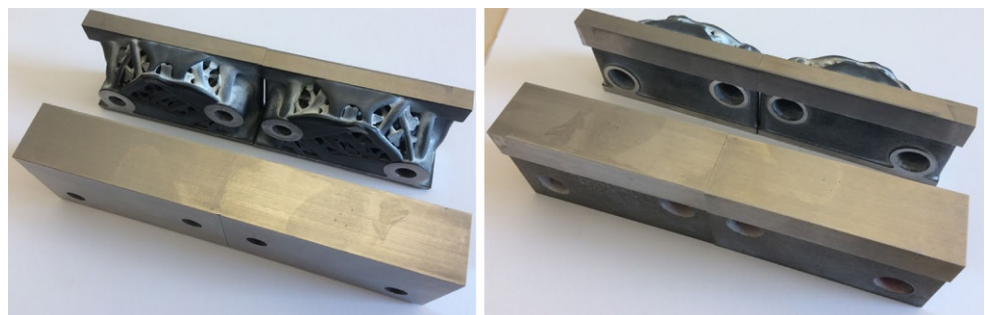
3D-printed solid and topology optimized trimming/blanking/cutting tool. Both versions are 3D-printed in DIN 1.2709. The hardness varies between 54 and 56 HRC. Both tool versions managed 100,000 strokes [17]
